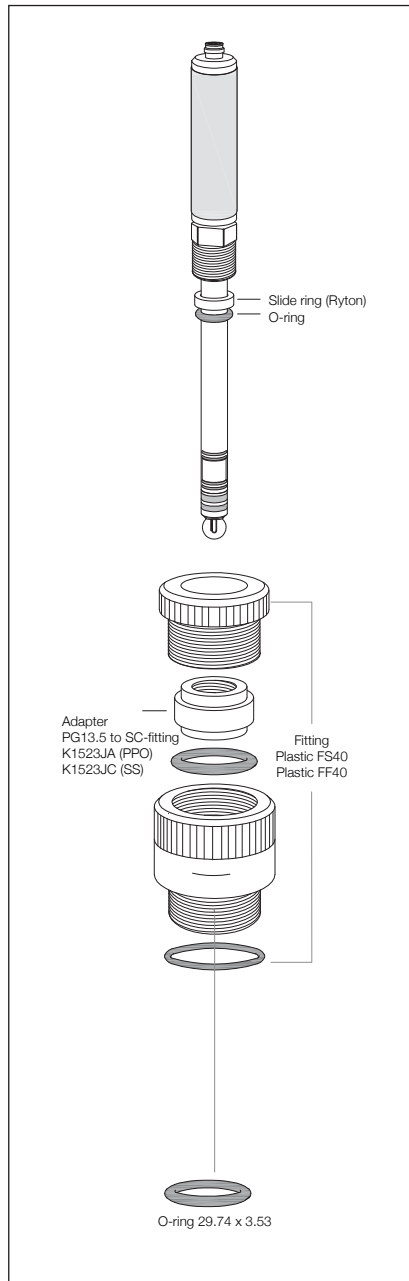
Mounting of sensor in plastic FS40 / FF40 fitting, using adapter K1523JA / K1523JC
